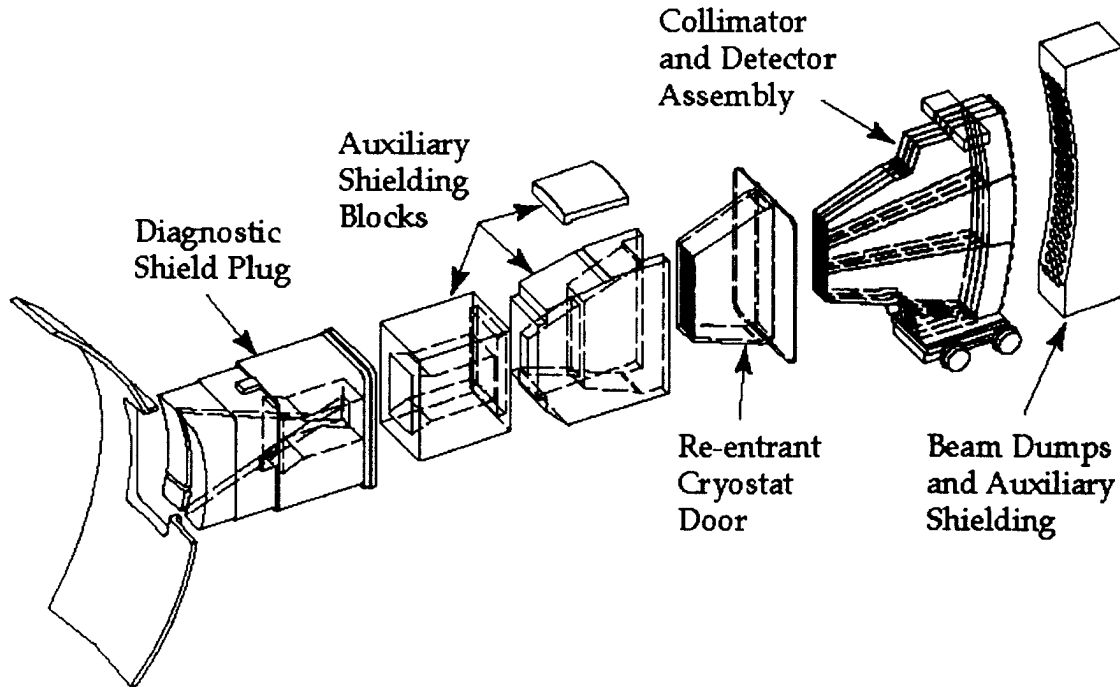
Exploded isometric view of the Radial Neutron Camera.
